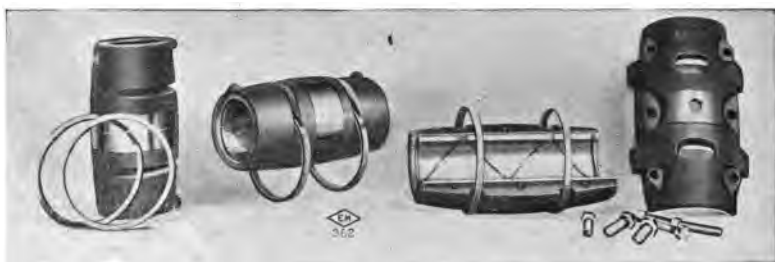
Bearings used on High Speed Generators (Electric Machinery Co.).
